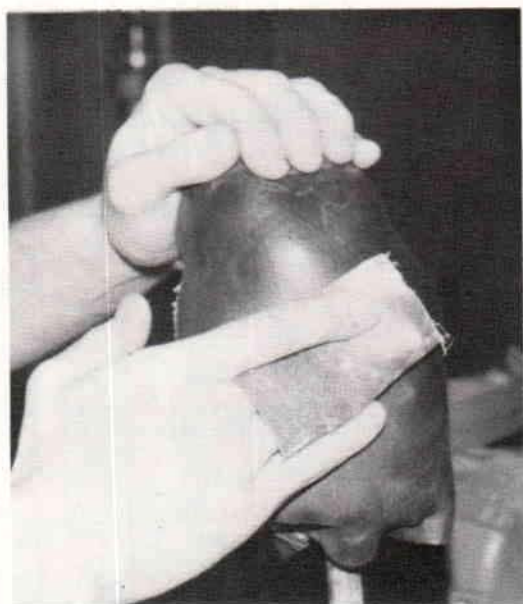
The outer surface is sanded until it becomes rough and sticky.
